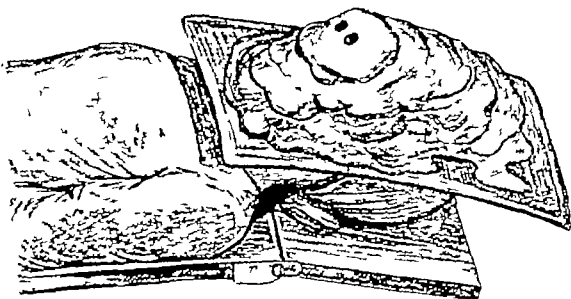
When making a mold the liquid plaster is cooled by using an electric fan while it is solidifying
